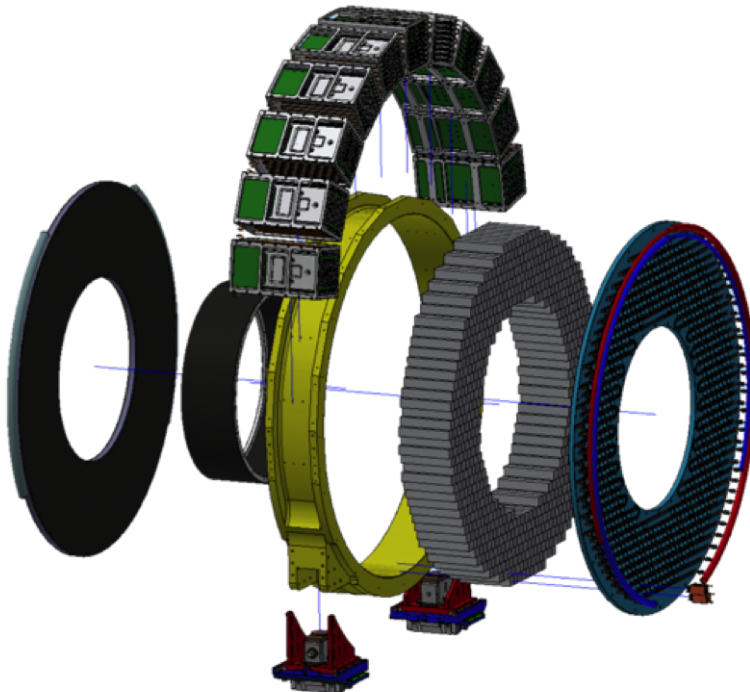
Exploded view of the calorimeter mechanical structure.
